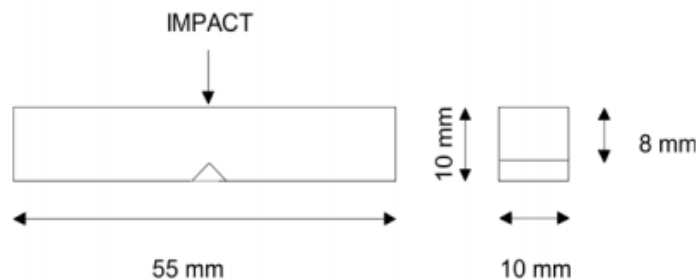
Charpy impact test specimen geometry by ASTM Standard Designation E23-566.
